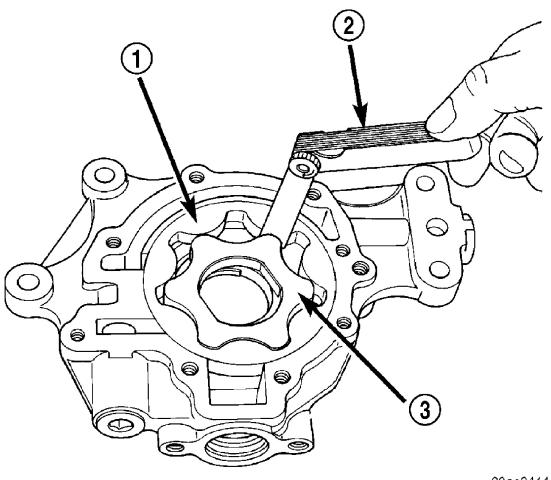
Measuring Clearance Between Rotors Courtesy of CHRYSLER LLC
